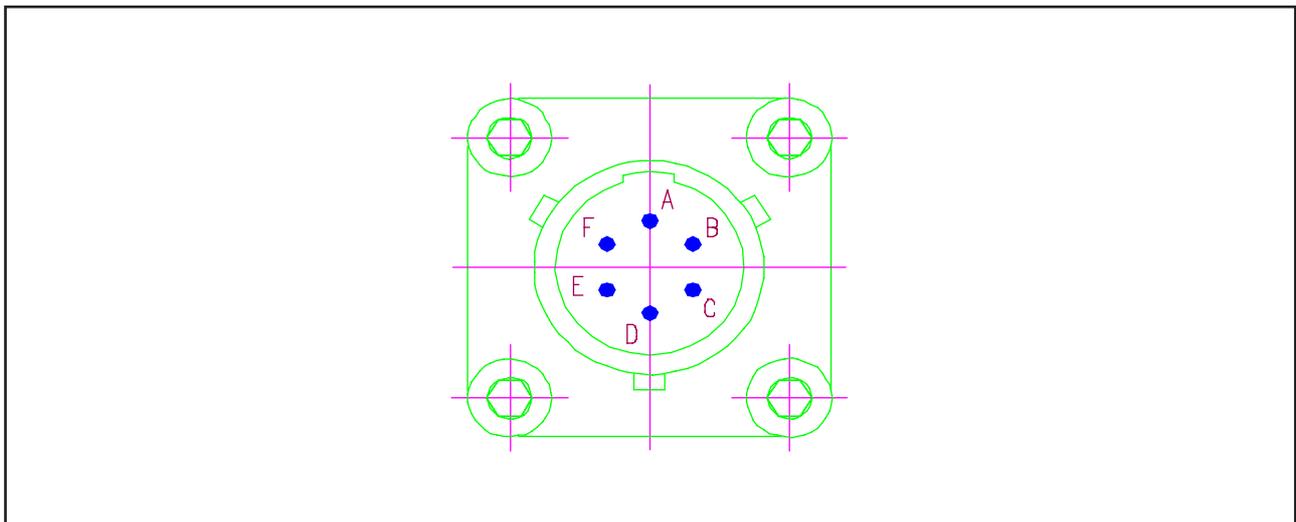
6-pole connector mounted on the TORQUEMASTER housing.
